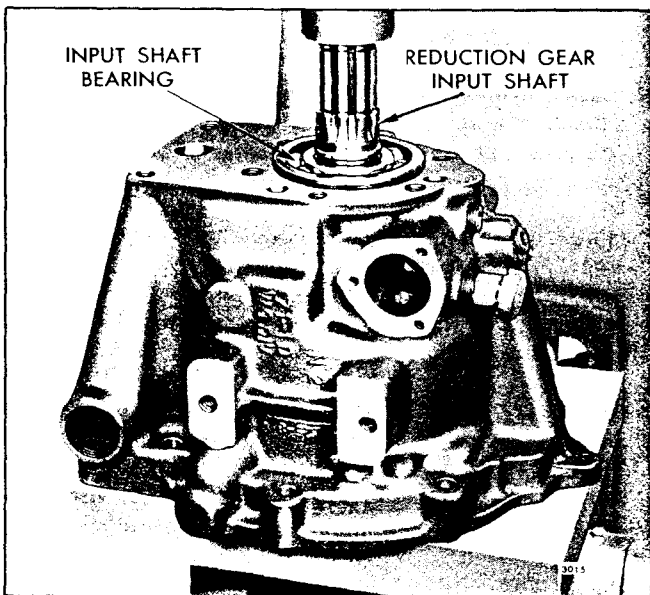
Removing Reduction Gear Planetary Gear and Input Shaft Assembly from Input Shaft Bearing (2.5:1 and 3:1 Ratios)
